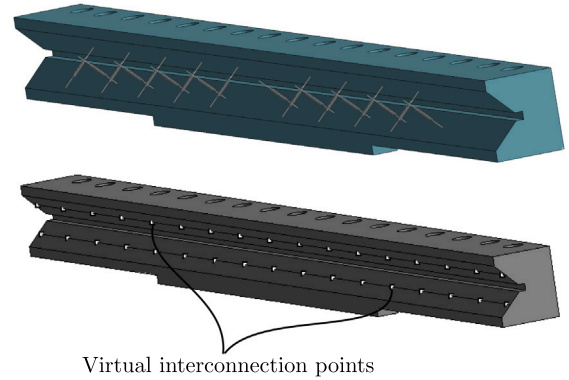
Top: CAD model of one-half of a cross-roller bearing rail, wherein 18 translational springs (indicated by the 18 purple lines) represent the roller bearings. Bottom: CAD model of one-half of a cross-roller bearing rail, wherein a grid of ($n_v = 17$) equidistant virtual interconnection points is defined on each interface.
